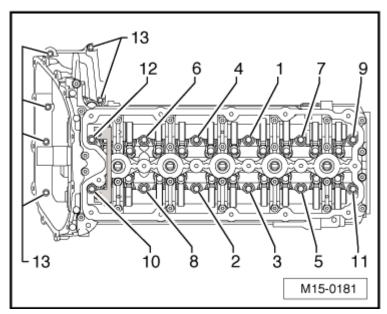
Identifying Cylinder Head Bolts Tightening Sequence Courtesy of VOLKSWAGEN GROUP OF AMERICA, INC.
